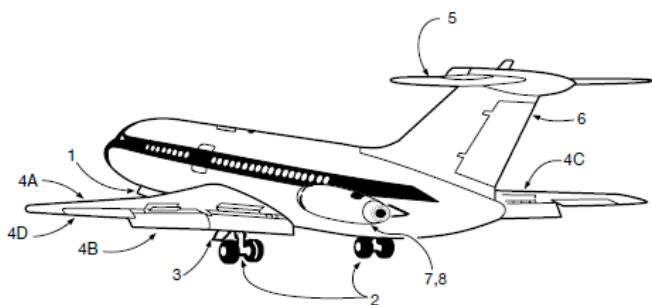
Spherical bearings application in aircraft structure: 1) Nose landing gear actuator, steering and support bearings 2) main landing gear actuator and support bearings, 3) door and canopy actuator and support bearings, 4A) leading edge slat actuator and support bearings, 4B) trailing edge flap actuator and support bearings, 4C) spoiler actuator and support bearings, 4D) aileron actuator and support bearings, 5) horizontal stabilizer actuator and support bearings, 6) vertical stabilizer actuator and support bearings, 7) thrust reverser actuator bearings, 8) pylon and engine mount bearings
